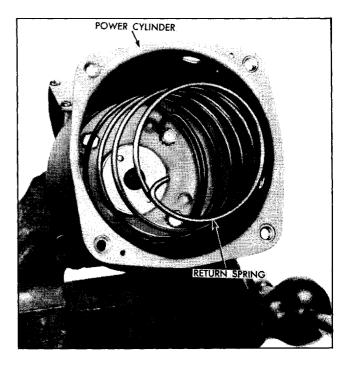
Power Cylinder Housing and Spring Assembly
